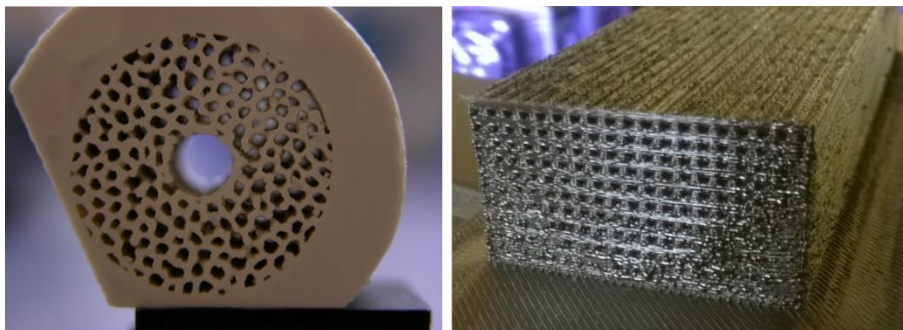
Cross section of a 3D printed hollow core fiber and a porous 3D printed preform.
